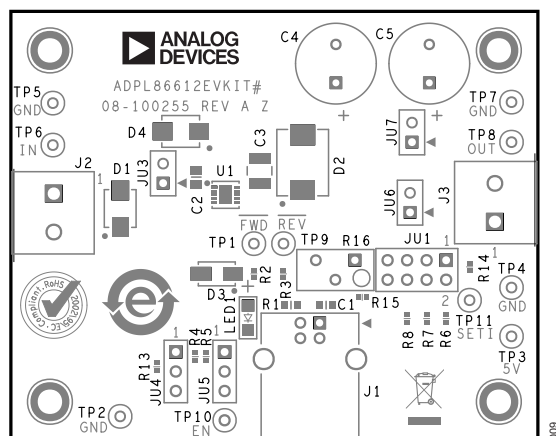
ADPL86612 EV Kit PCB Layout—Top Silkscreen
